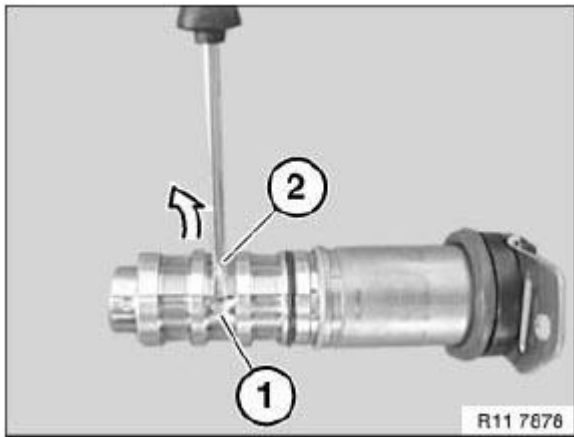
Bending Open Welding Spots On Filter Element
